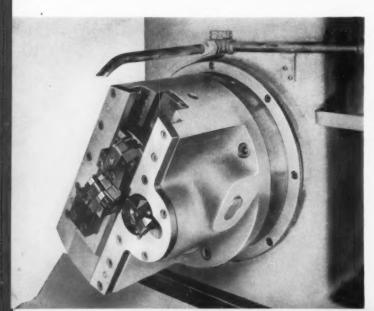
Generating boring head equipped with band type holders and solid-carbide inserts for rough-facing the web and flange on the cylinder end of the compressor crankcase
